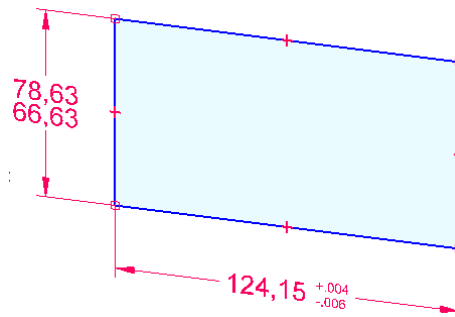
Sketch dimensioned by using the limit and unit tolerance dimension types
